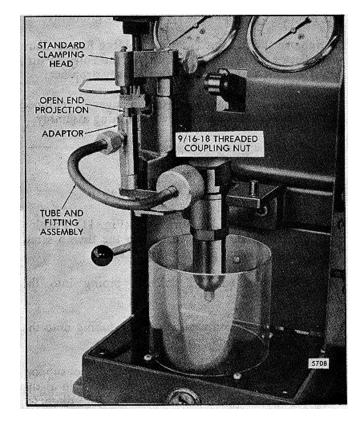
Adaptor and Tube Assembly on Injector Tester J 23010
